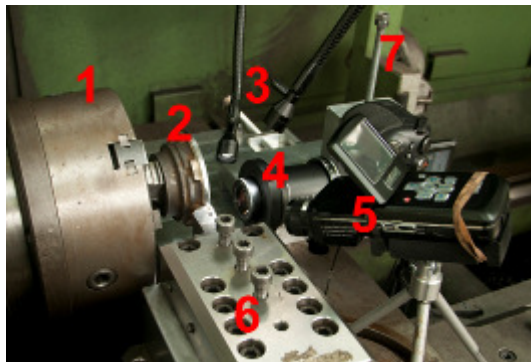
Multifunction measuring system, 1 – chuck; 2 – sample; 3 – cold light; 4 – high-speed imaging camcorder, 5 – thermo-vision system; 6 – dynamometer with tool; 7 – macro-stand
